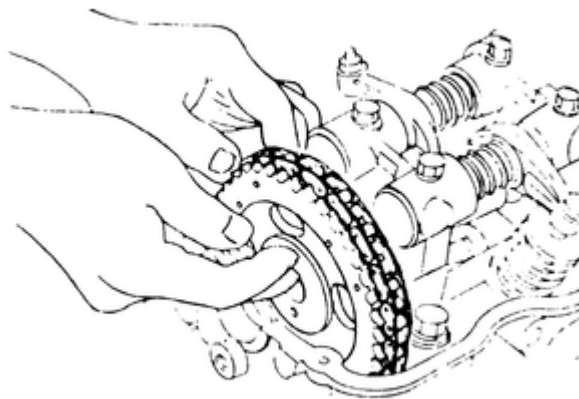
Use a wooden wedge to support the timing chain — 4-cylinder engines
